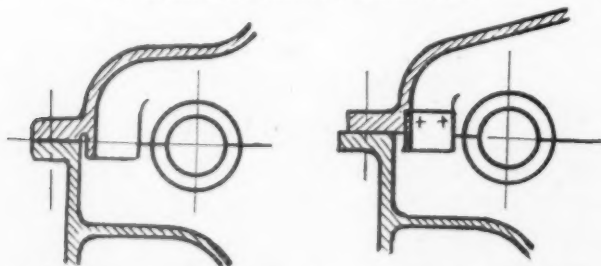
CORRECT DESIGN (RIGHT) FOR PART HAVING THIN PROTRUDING SECTION. THIS DESIGN SHOWS MAKING PROTRUDING SECTION AS SEPARATE CASTING AS COMPARED WITH INCORRECT DESIGN ON THE LEFT.
